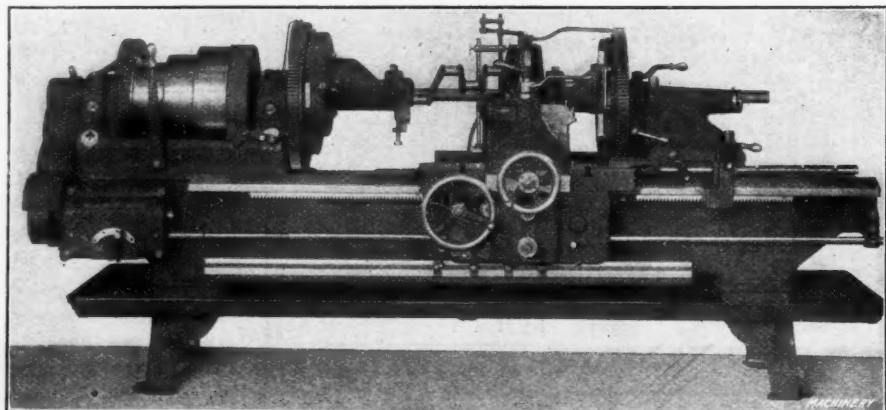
Front View of Type A or Universal Machine equipped with Double End Drive
